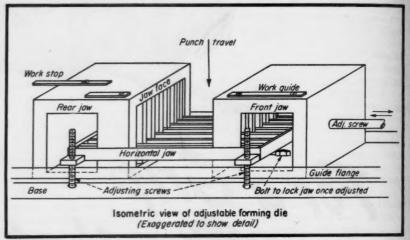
Isometric view showing how adjustable jaws of forming die assembly intermesh to form die for crimping copper connector.
